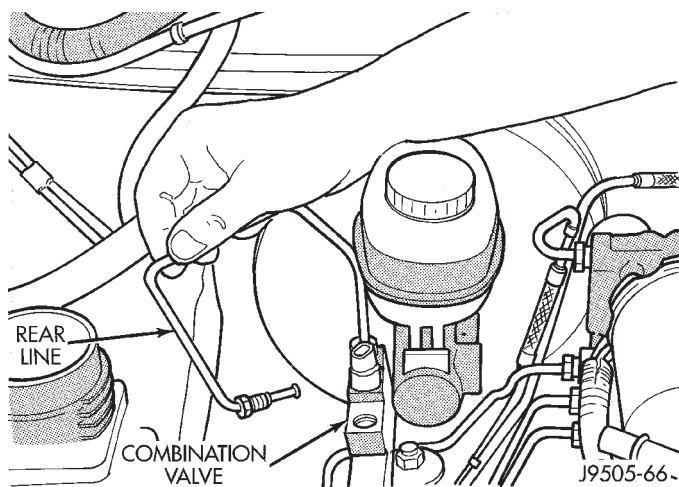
Disconnecting Master Cylinder Rear Brakeline
